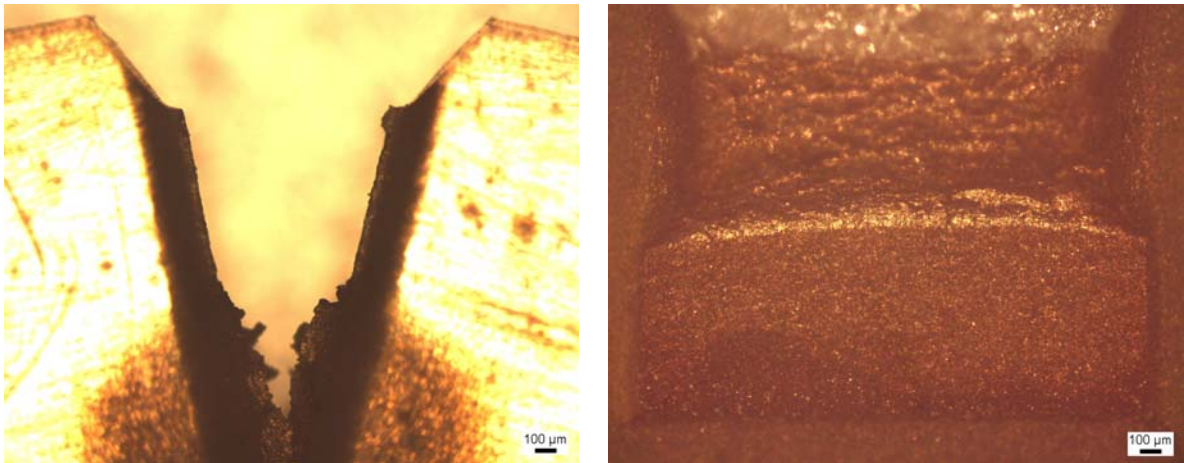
(left) Side view of side grooved mini-bar EUROFER 97 specimen (EF67); Starter notch type "V"; $a_0/W \approx 0.34$; (right) Fracture surface of side grooved mini-bar EUROFER 97 specimen (EF67).
